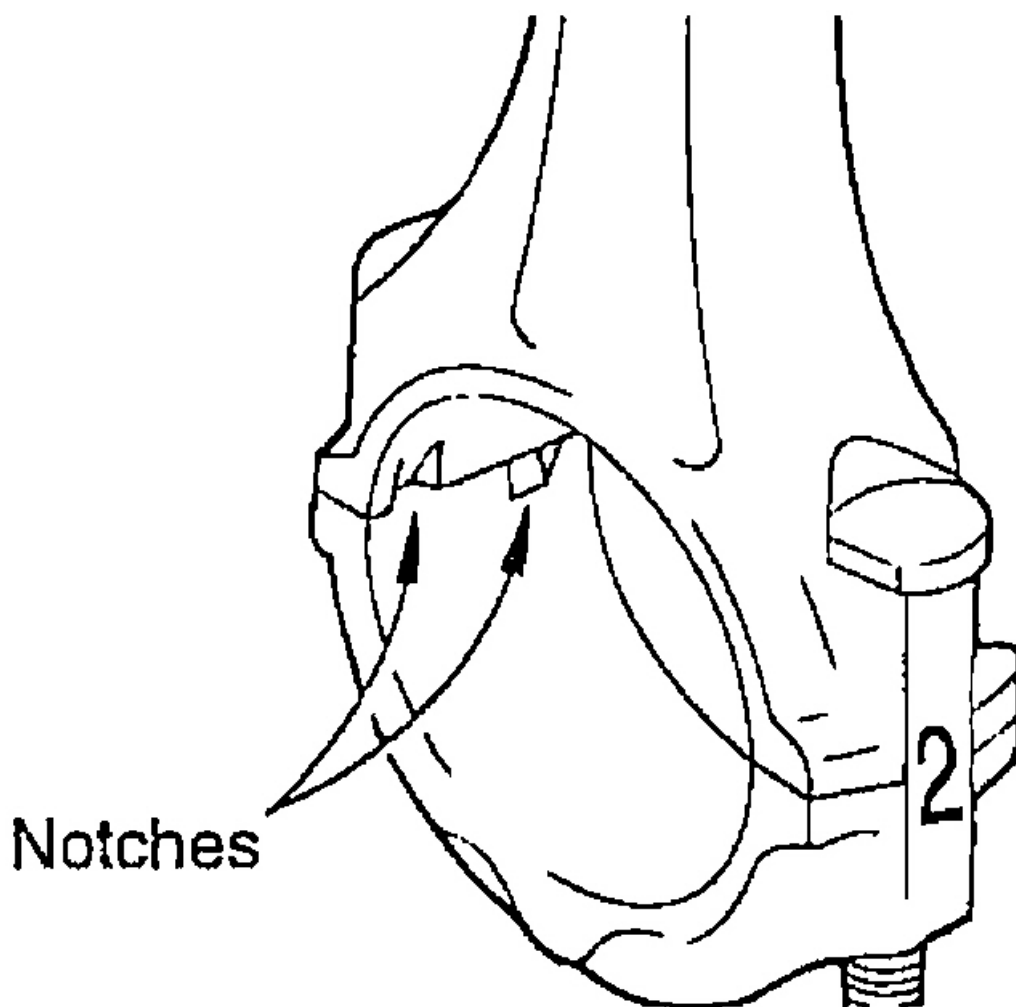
Identifying Connecting Rod Cap Identification Numbers
